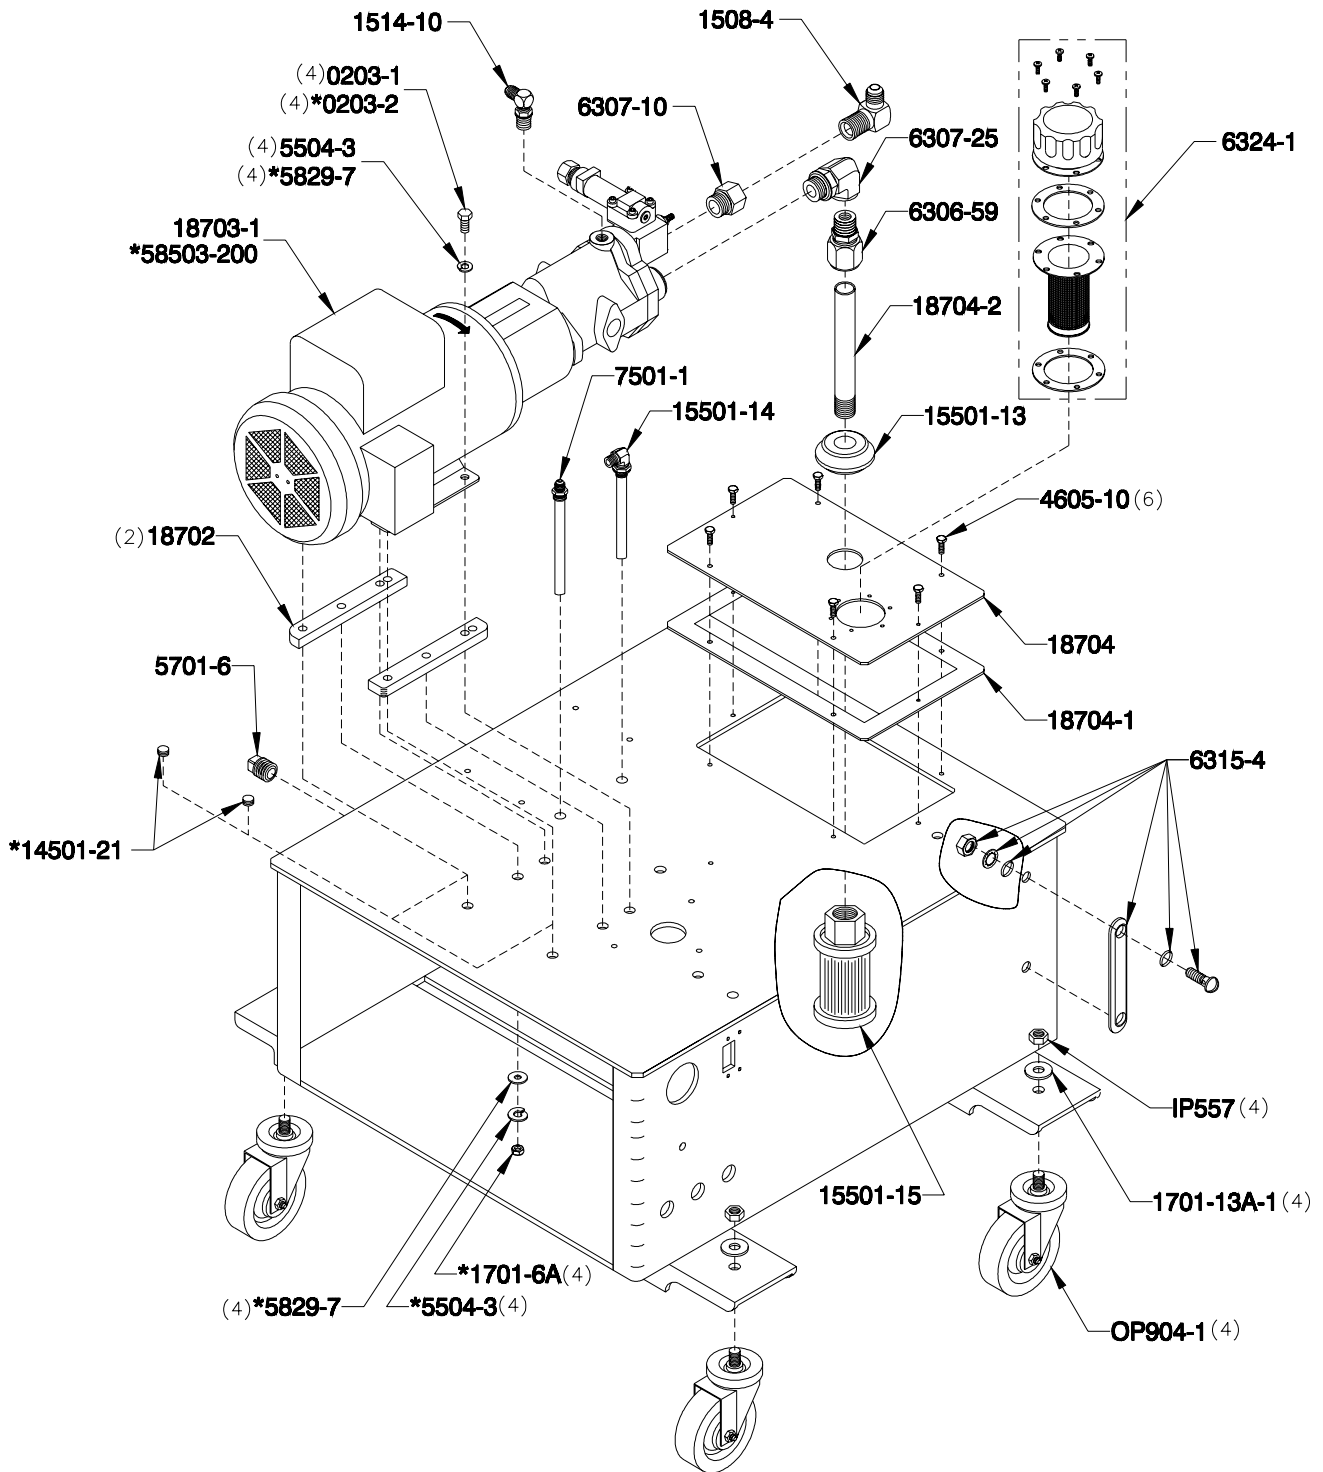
Hydraulic Tank and Electric Motor Assembly, (Part No. 18700-SIZE), Exploded View
